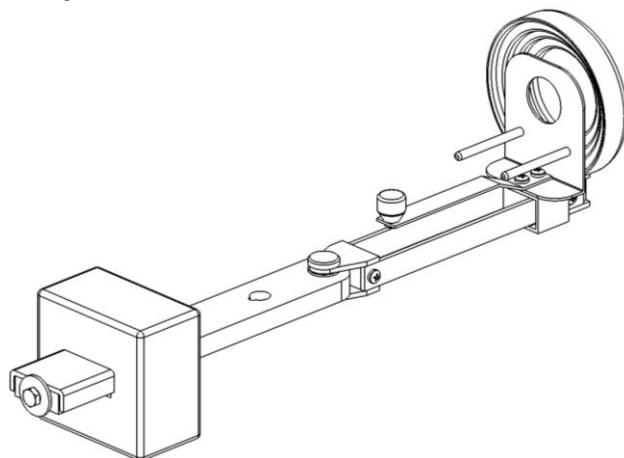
Isometric view of full assembled casting arm, shown without crucible or casting flask
